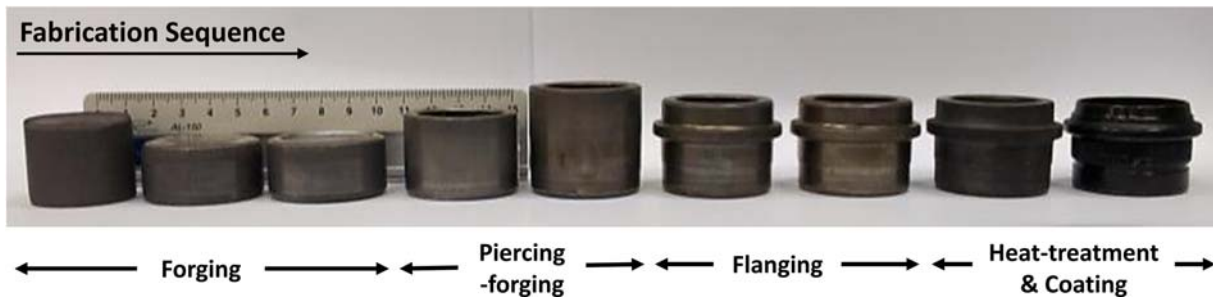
Low-magnification photographs showing fabrication processes of an actual component of a cold heading quality steel wire rod of the 4C steel, which are composed of several hits such as forging, piercing-forging, and flanging.
